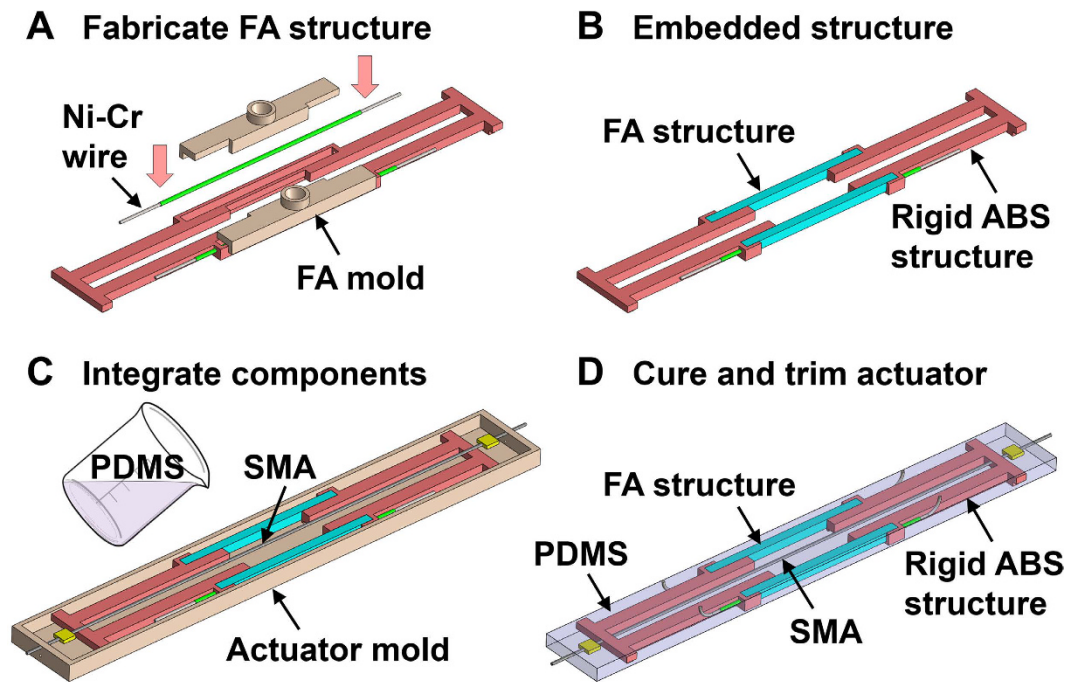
Schematic diagram outlining fabrication process of the basic actuator. (A) The FA structure is casted using mold with features to embed the PI tube covered Ni-Cr wire. (B) The FA mold is removed to obtain the embedded structure of actuator. (C) The embedded structure and the SMA wire are placed in the mold of the actuator, and then the pre-mixed uncured elastomer is poured into the mold. (D) The assembly is thermally cured and the mold of the actuator is removed to obtain the finished actuator.
